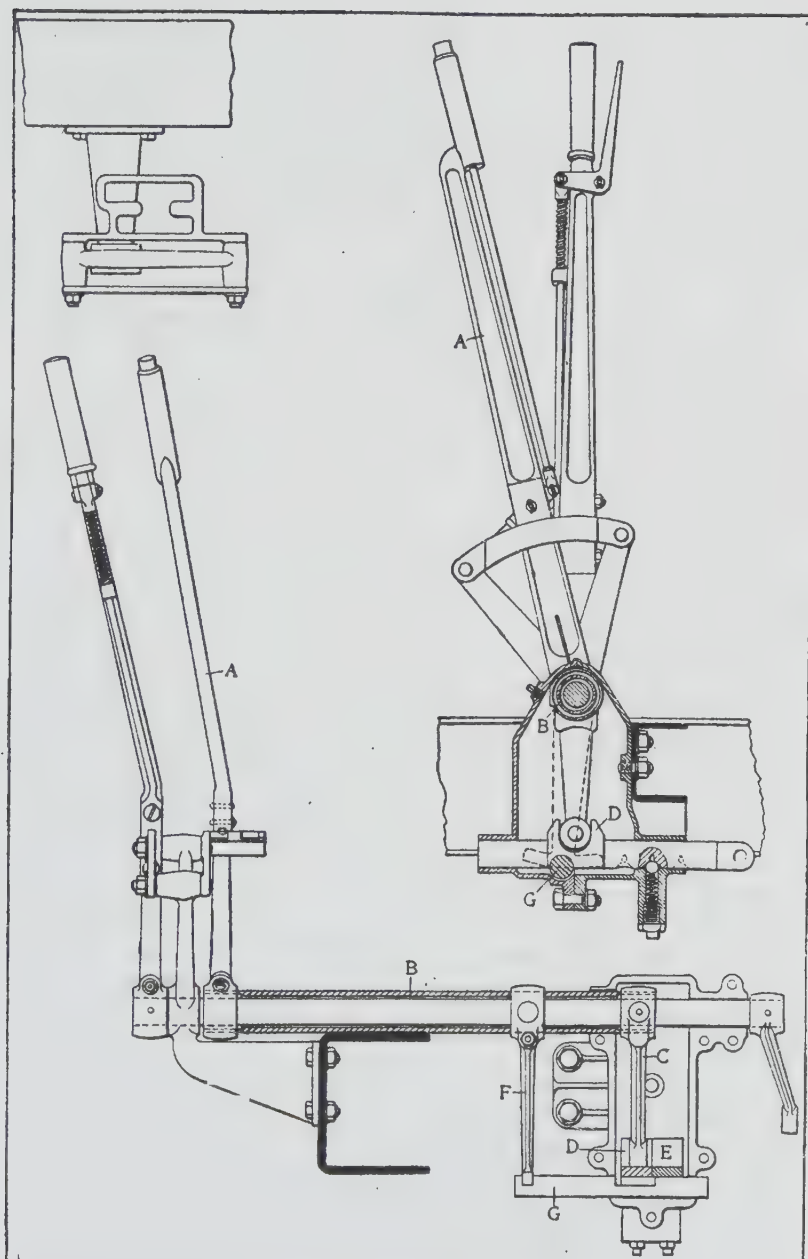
SLIDING LEVER SELECTIVE GEAR CONTROL
